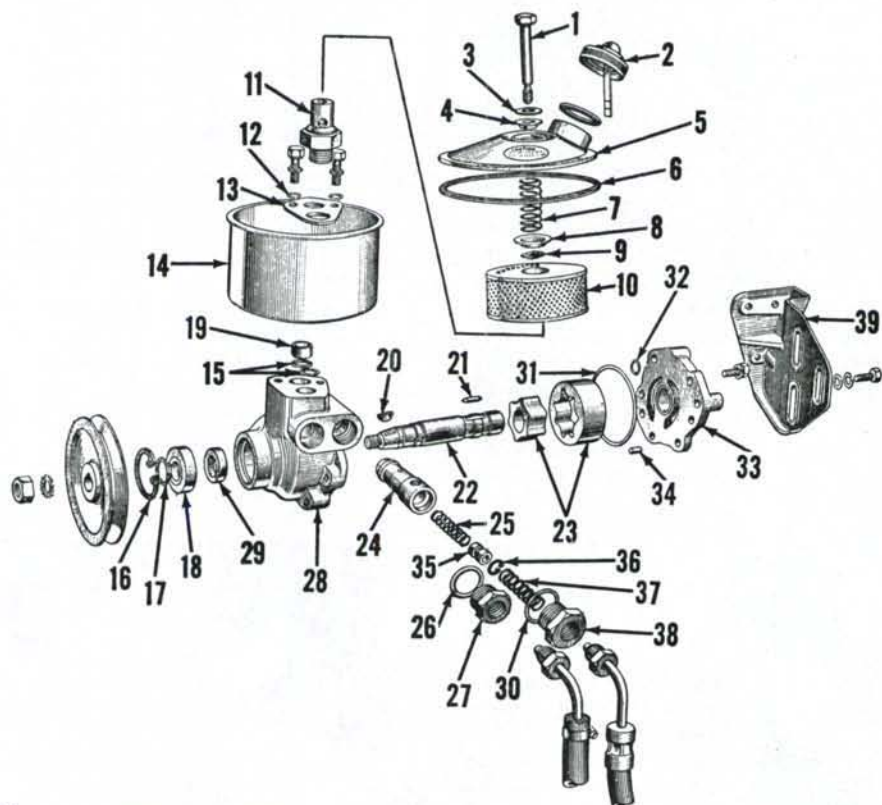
Exploded view of the power steering pump and reservoir assembly. Pump bracket (39) for early models is different than shown.
